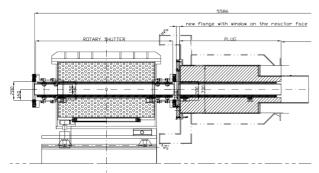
The side view of the primary shutter and the in-pile plug assembly
